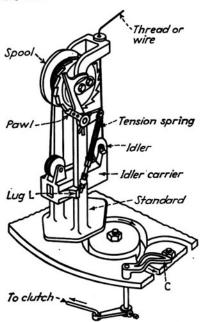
Mechanism used with variations on tubular braiding machines. When braiding, tension on the wire or thread lifts the idler carrier which thereby releases the pawl from the ratchet on spool flange and allows the spool to turn and unwind. When the machine stops, the tension on wire is decreased, allowing the idler carrier to fall so that the pawl can engage the ratchet. If the wire breaks while the machine is running, the unsupported idler carrier falls to the base of the standard, and when the standard arrives at the station in the raceway adjacent to the cam C, the lug L on idler carrier strikes the cam C, rotating it far enough to disengage a clutch on the driving shaft, thereby stopping the machine.
